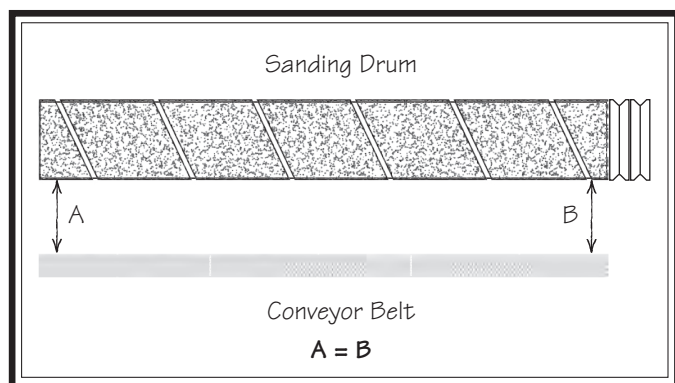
Sanding drum parallel to conveyor belt (viewed from front of machine).
